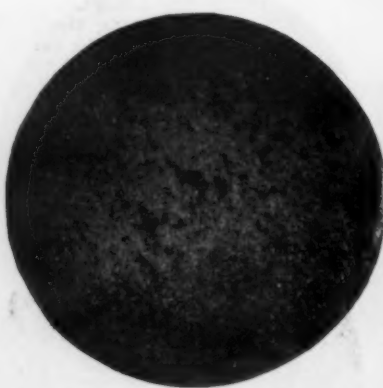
Inclosed Gas (Copper-Tin-Lead Bearing).
